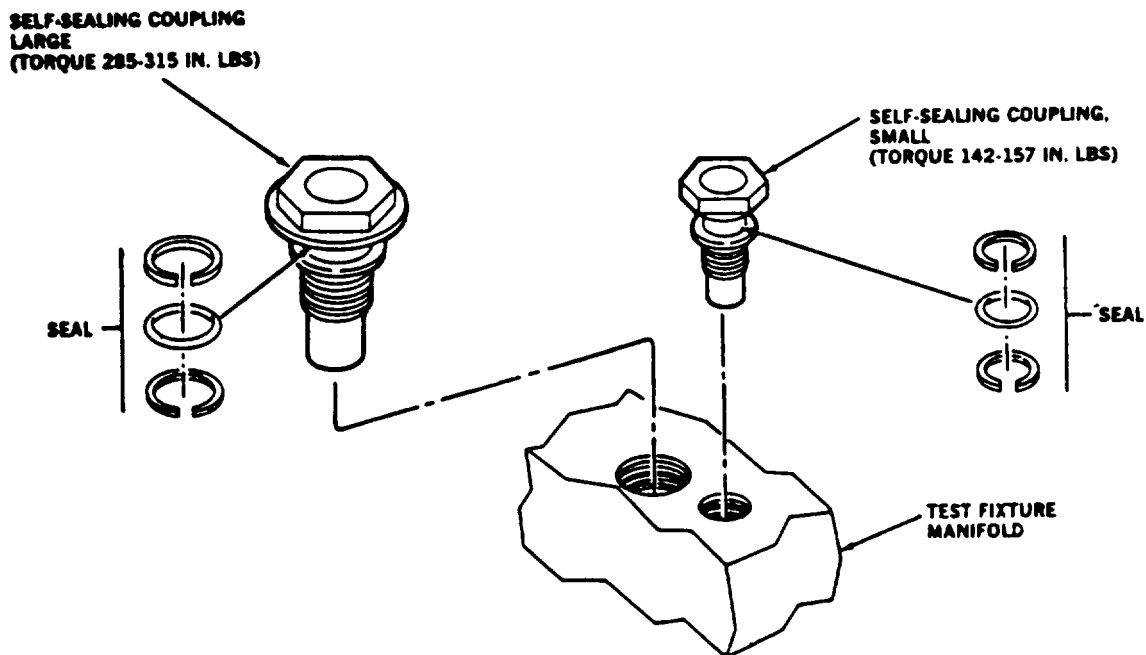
Female Quick-Disconnect Couplings Removal and Replacement
